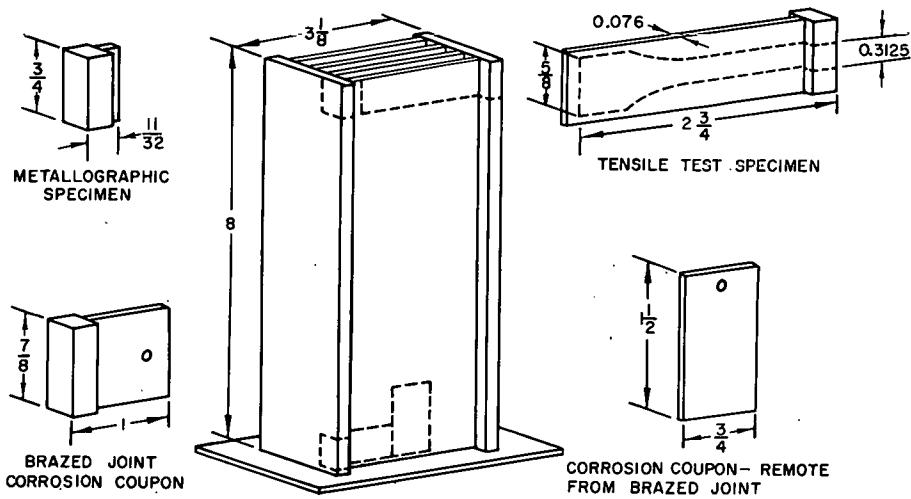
Brazement and Specimens for Corrosion and tensile tests; All Dimensions in Inches
